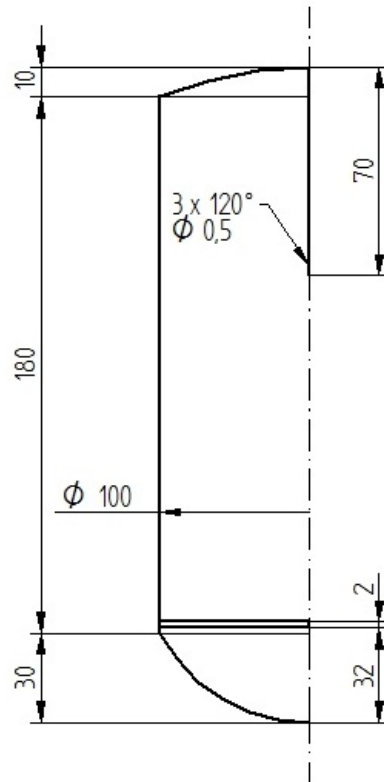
Axial section of the contactor together with the main dimensions (in mm)
